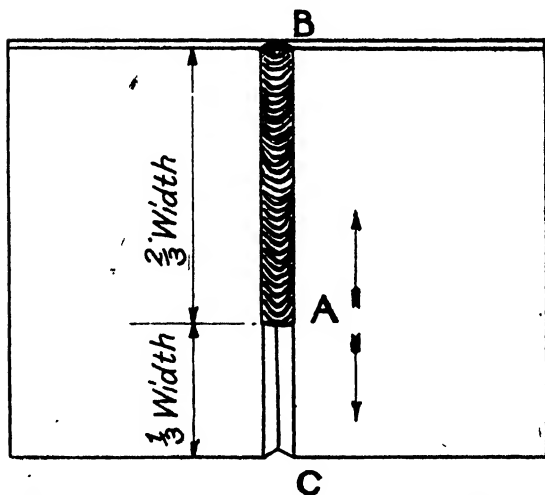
WELDING OF COPPER TO OVERCOME AFTER-CRACKS
